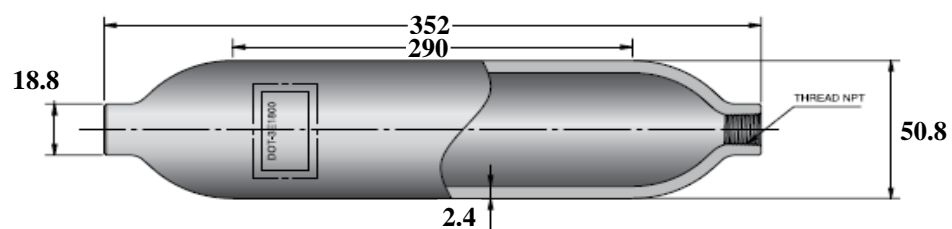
Sample cylinder used as a mixing chamber [140]. (All dimensions in mm)
